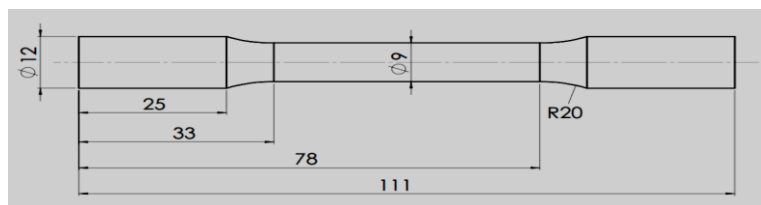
Dimensions of the tensile testing specimen as regard to ASTM E8-09 [1].
